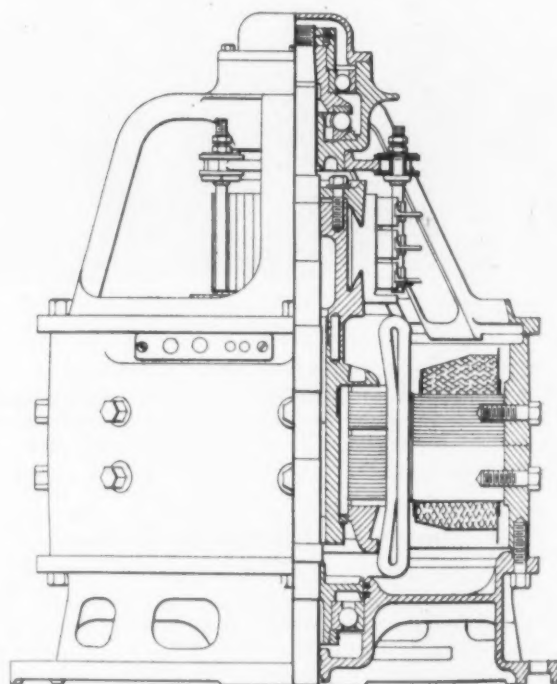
Vertical Ball Bearing Mounting on General Service Motor
